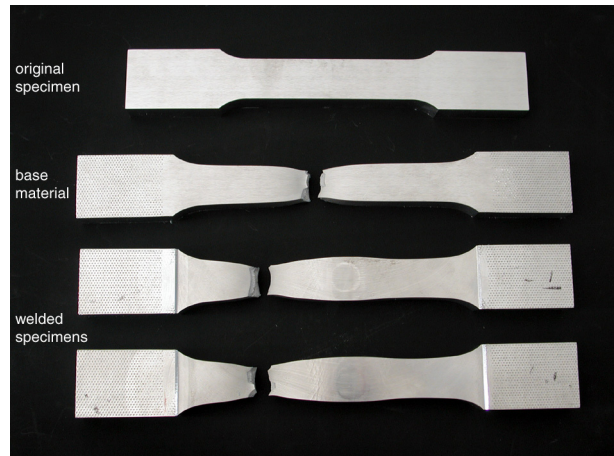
Flat tensile specimens for characterisation of stitch welds.
